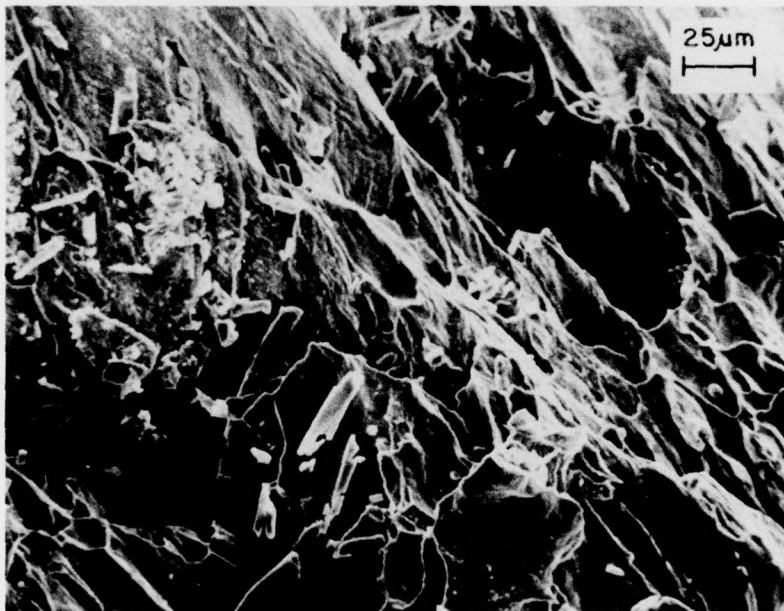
Typical fracture surface showing siliceous debris
